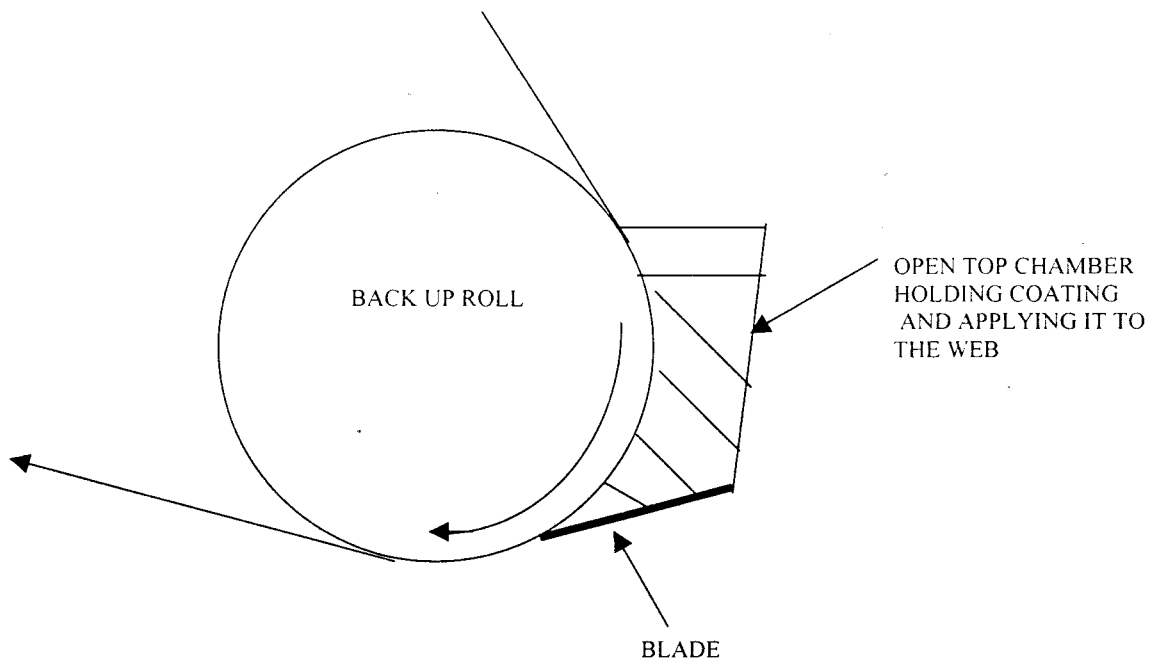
POND OR PUDDLE TYPE BLADE COATER
